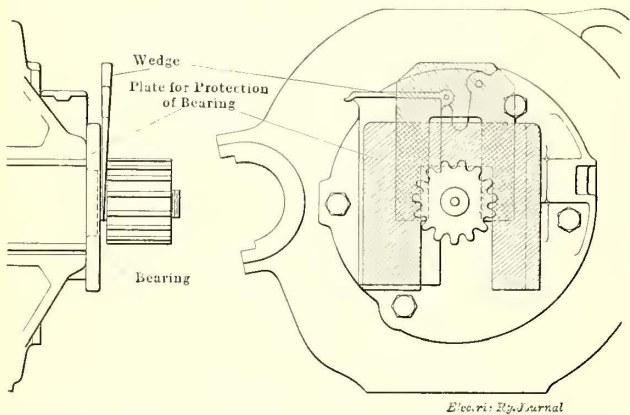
APPLICATION OF PLATE AND WEDGE FOR REMOVING PINION
